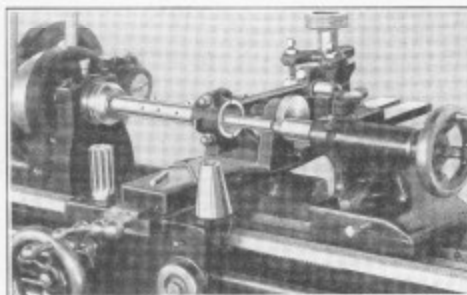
Boring a Connecting Rod on a South Bend Lathe
